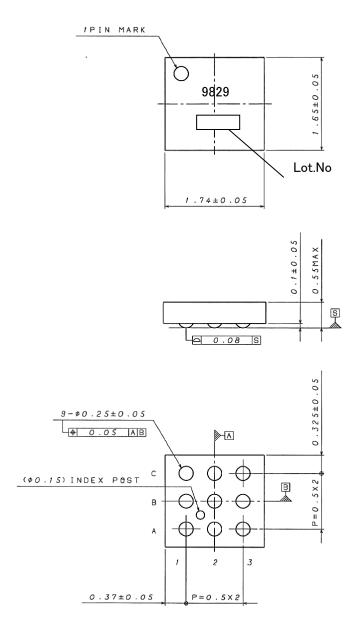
PHYSICAL DIMENSION VCSP50L1 (BU9829GUL-W)
